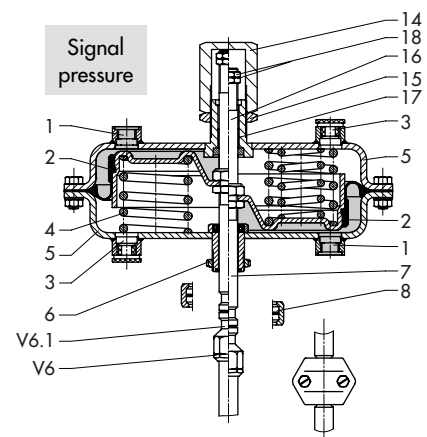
· Type 3271 Pneumatic Actuator with adjustable travel stop
